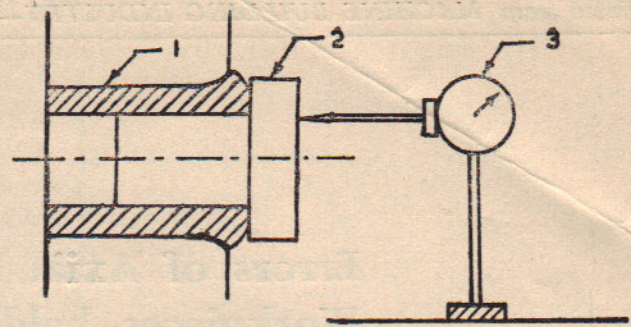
Experimental set-up: (1 : collet, 2 : workpiece, 3 : dial gauge).
